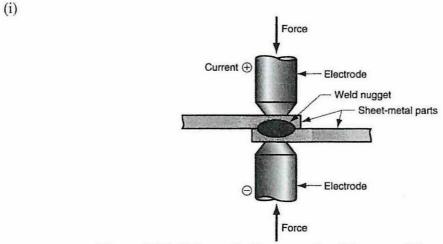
Schematic diagram of resistance welding.
